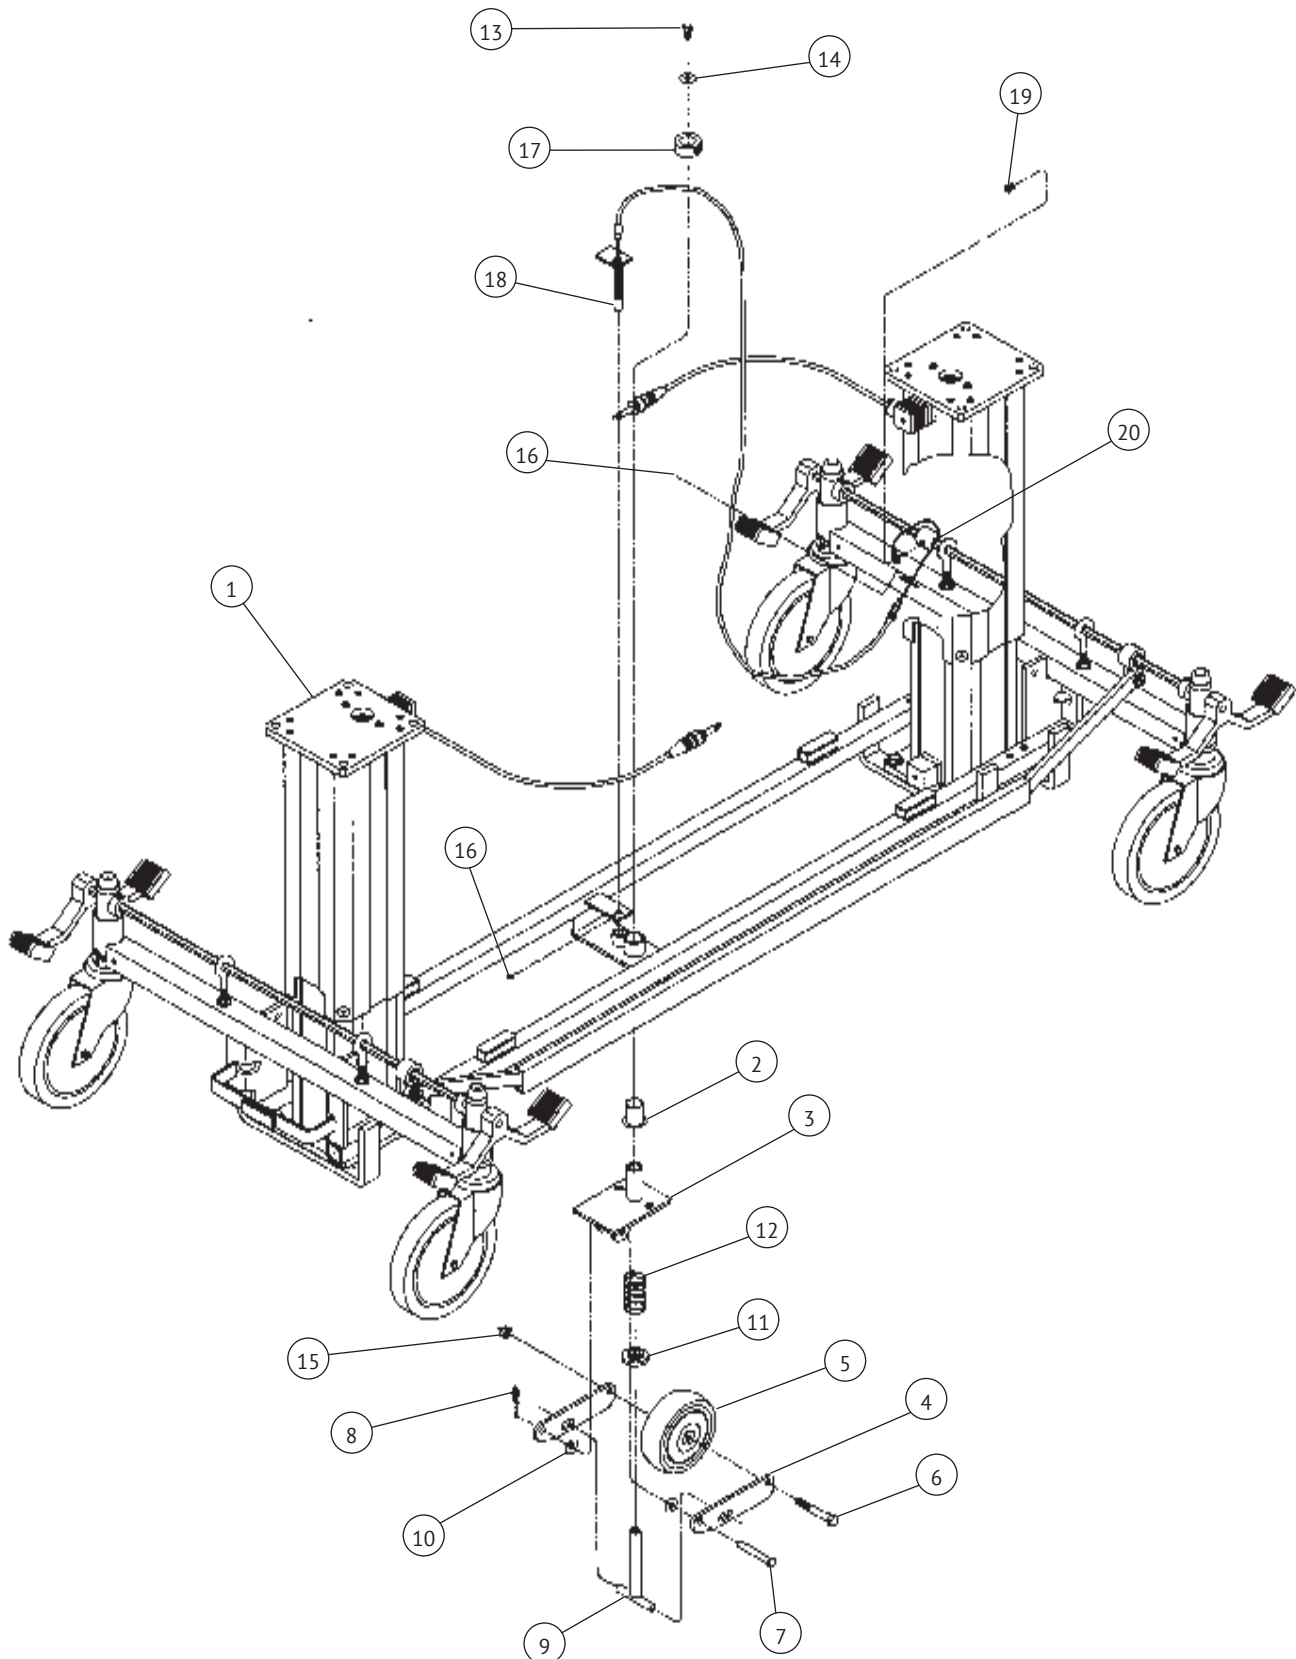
FIFTH WHEEL ASSEMBLY (BEFORE 9/1/99)
